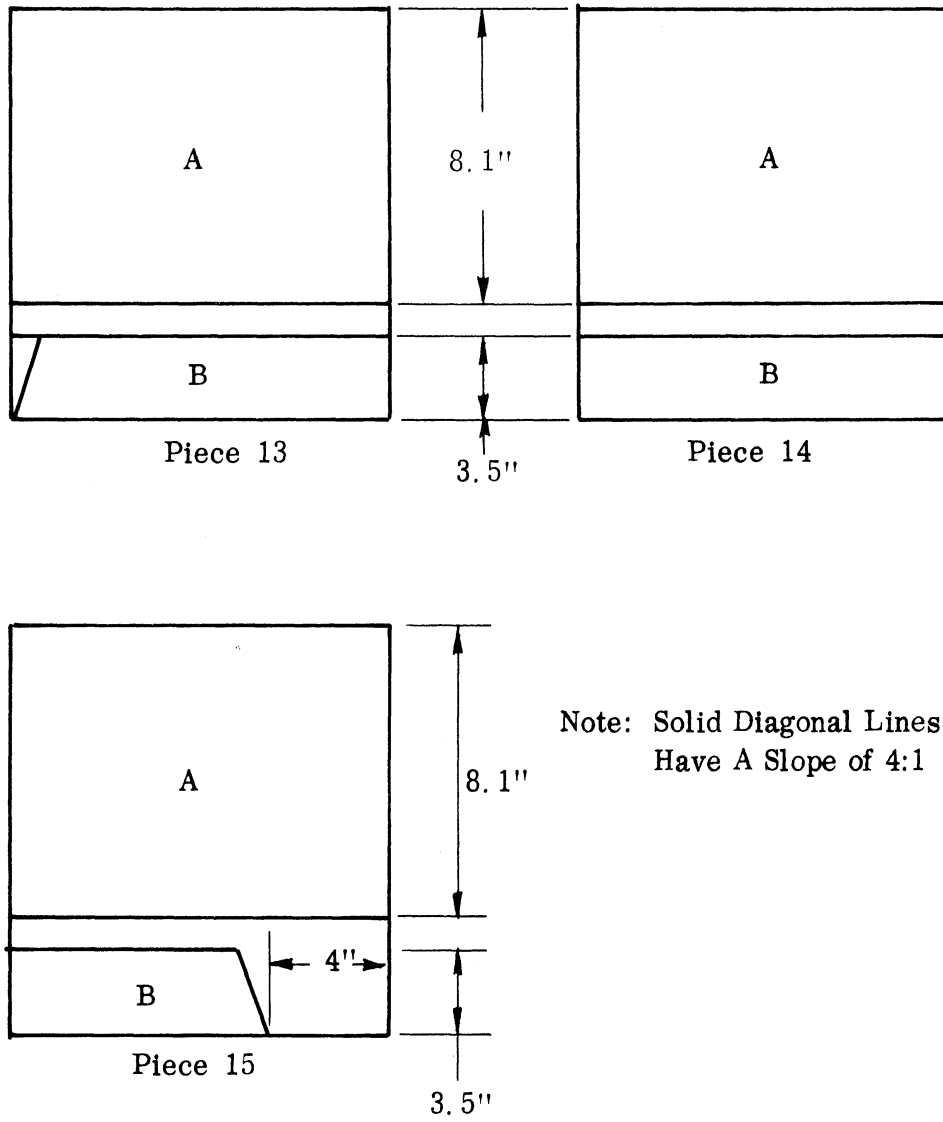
C: CUTTING OF 1" x 12" x 12" PIECES OF FLEXIBLE HI-K-6 DIELECTRIC
